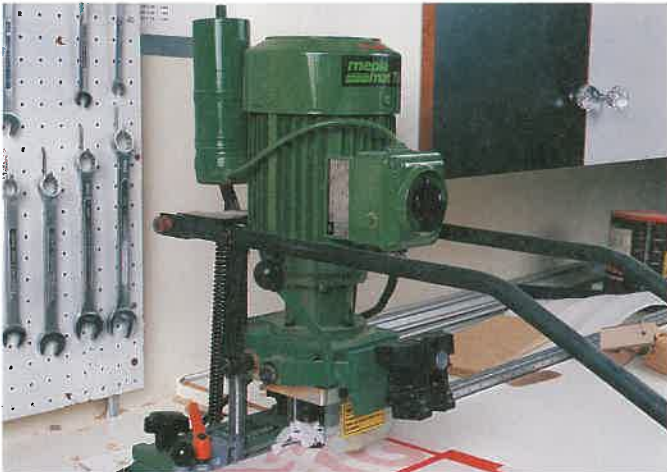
Place a board under the plastic while drilling. When boring holes for Euro-hinges, the backer must be thick enough for the plastic to contact the stops. (Chuck Davis Cabinets)
